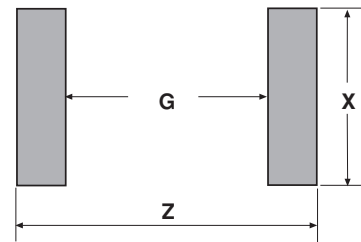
DIMENSIONS AND LAND PATTERN in inches (millimeters)
